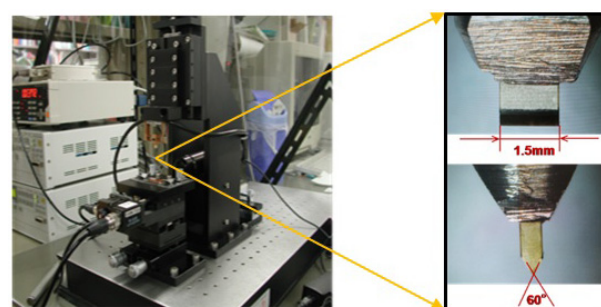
Picture of nanoplastic forming equipment and the diamond knife-edge tool.
